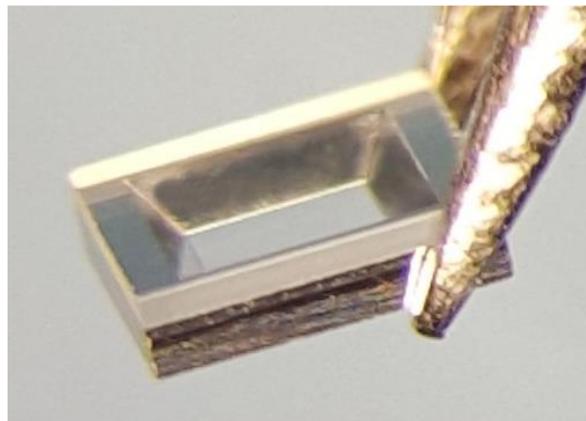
Macroscopic picture of reflector cap for SMD-packaging
